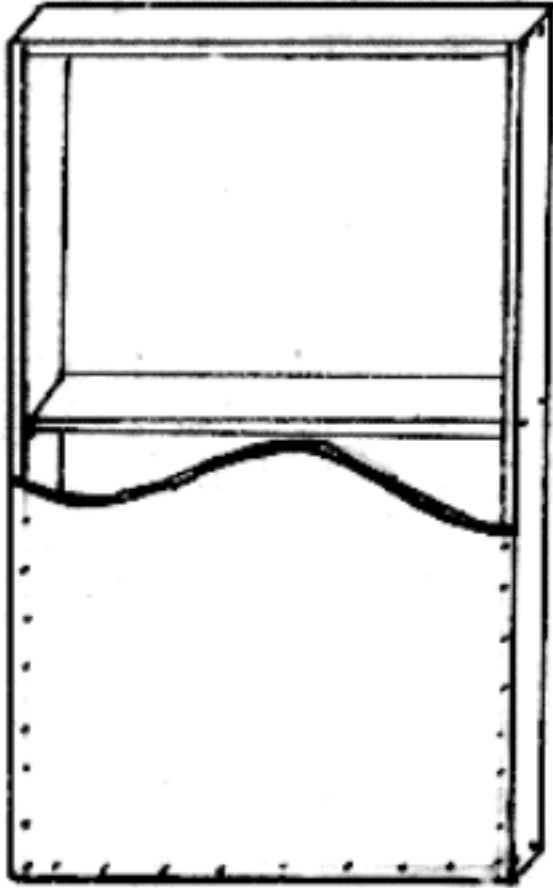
Construction of a typical hard flat. 1 inch lumber is used for frame and 1/4 inch plywood is used to cover it.
